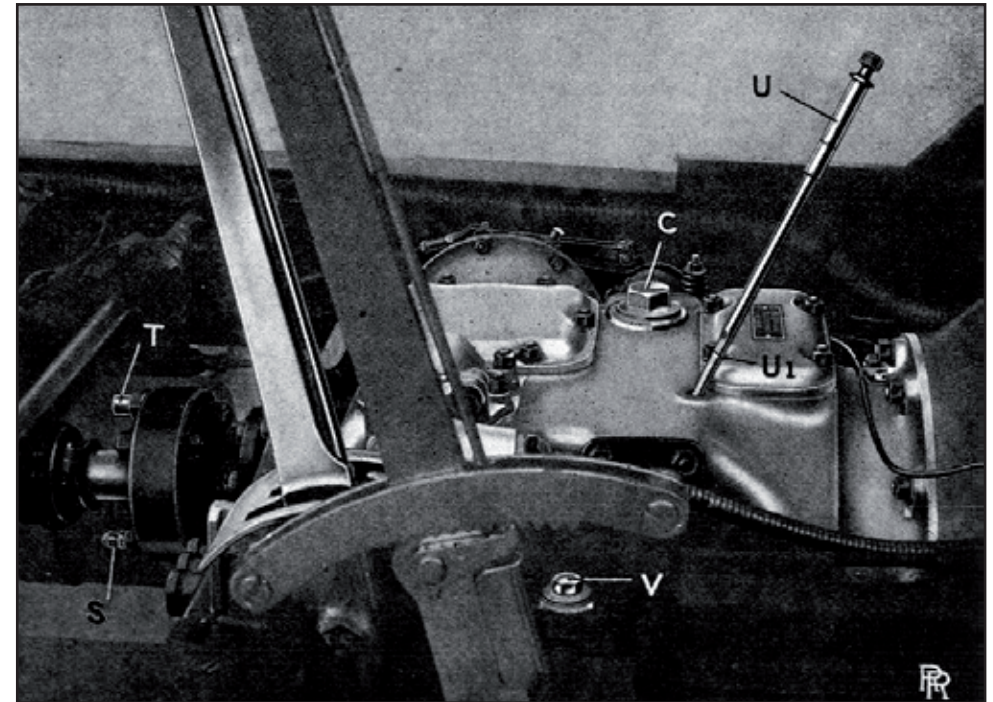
GEARBOX AND FORWARD UNIVERSAL JOINT
